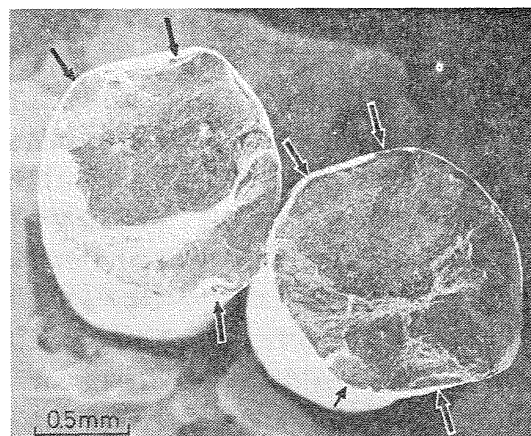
Fracture ends of innerlayers (Fatigue cracks have initiated from the arrowed surface areas)
